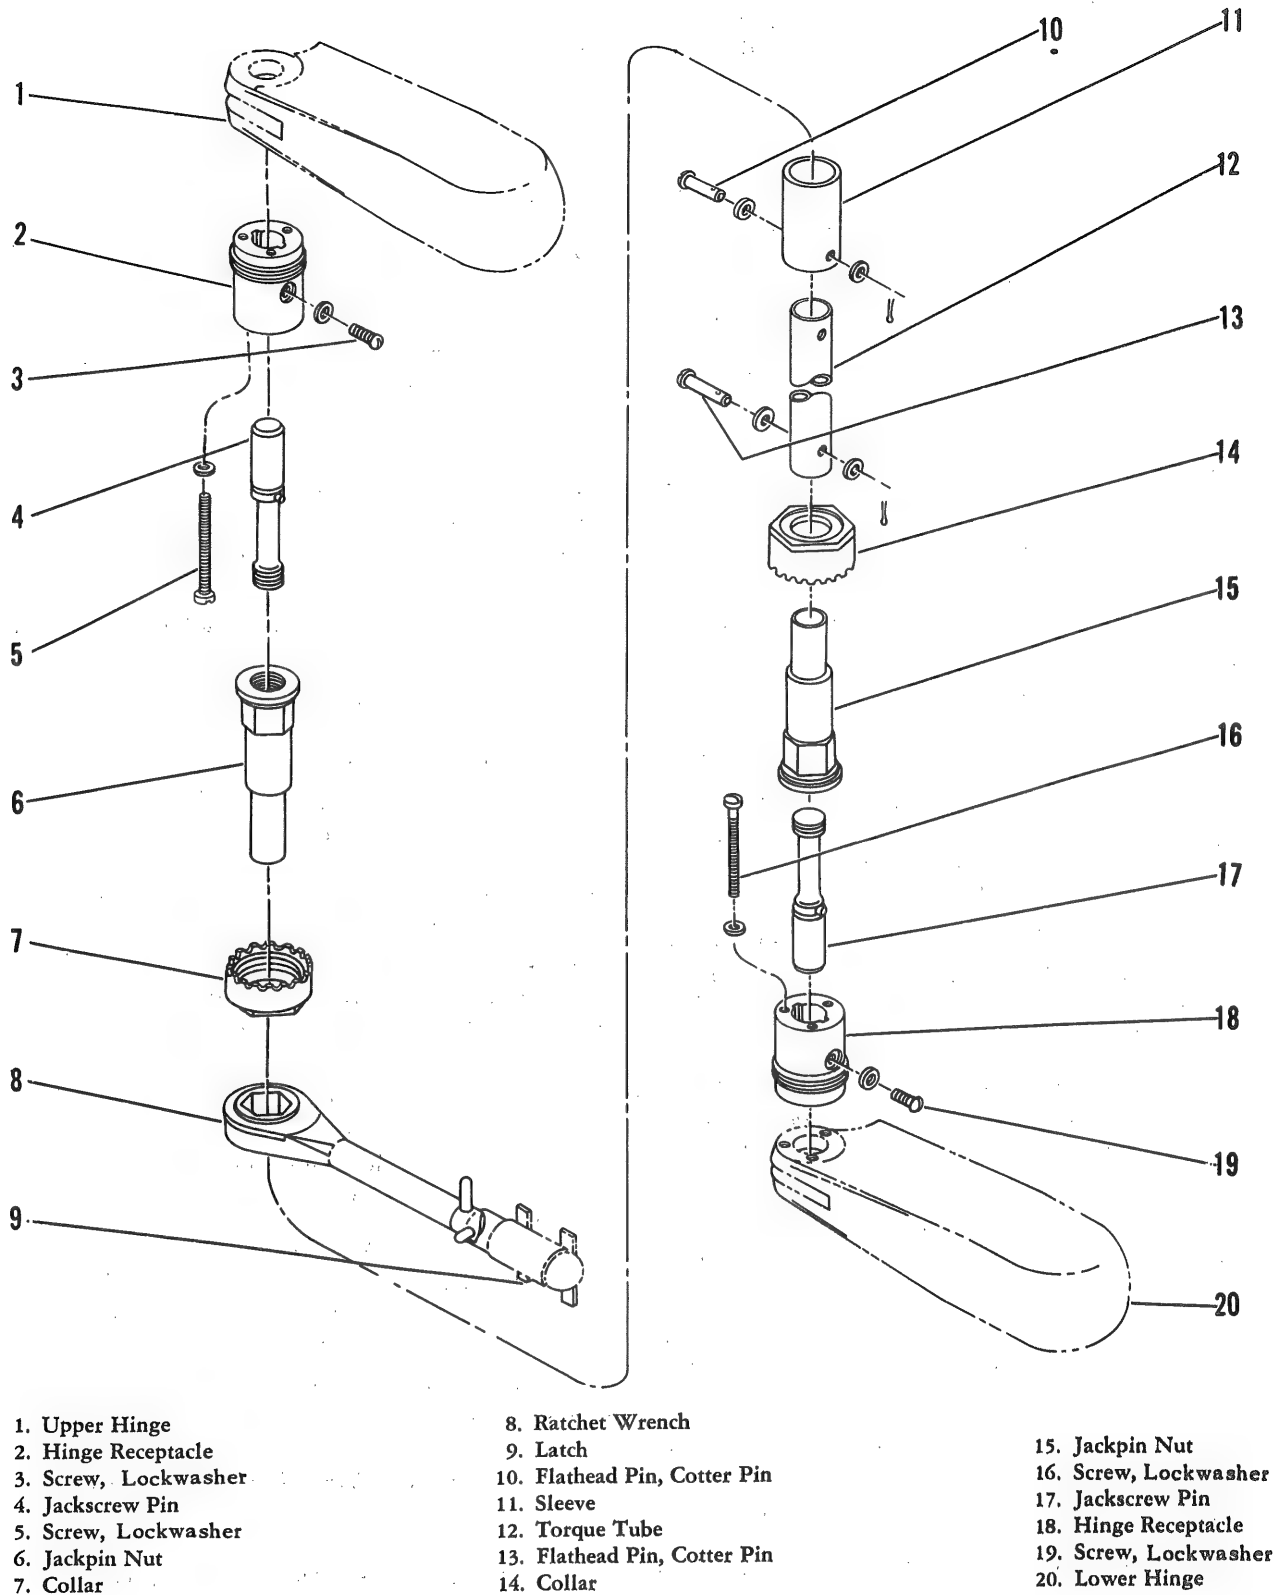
Pylon Folding Hinge Lock Disassembled
